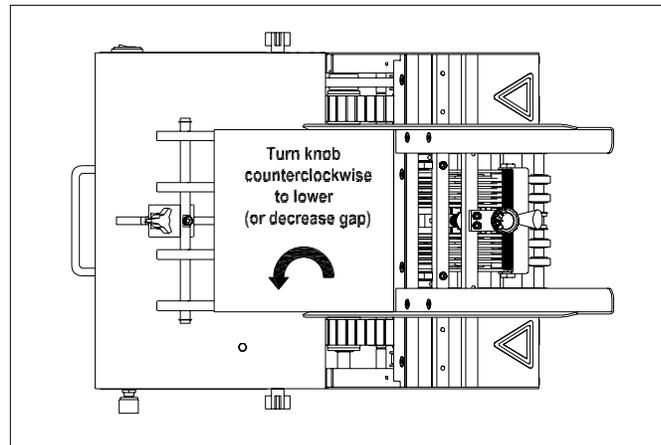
Adjusting Gate Assembly for Correct Gap
